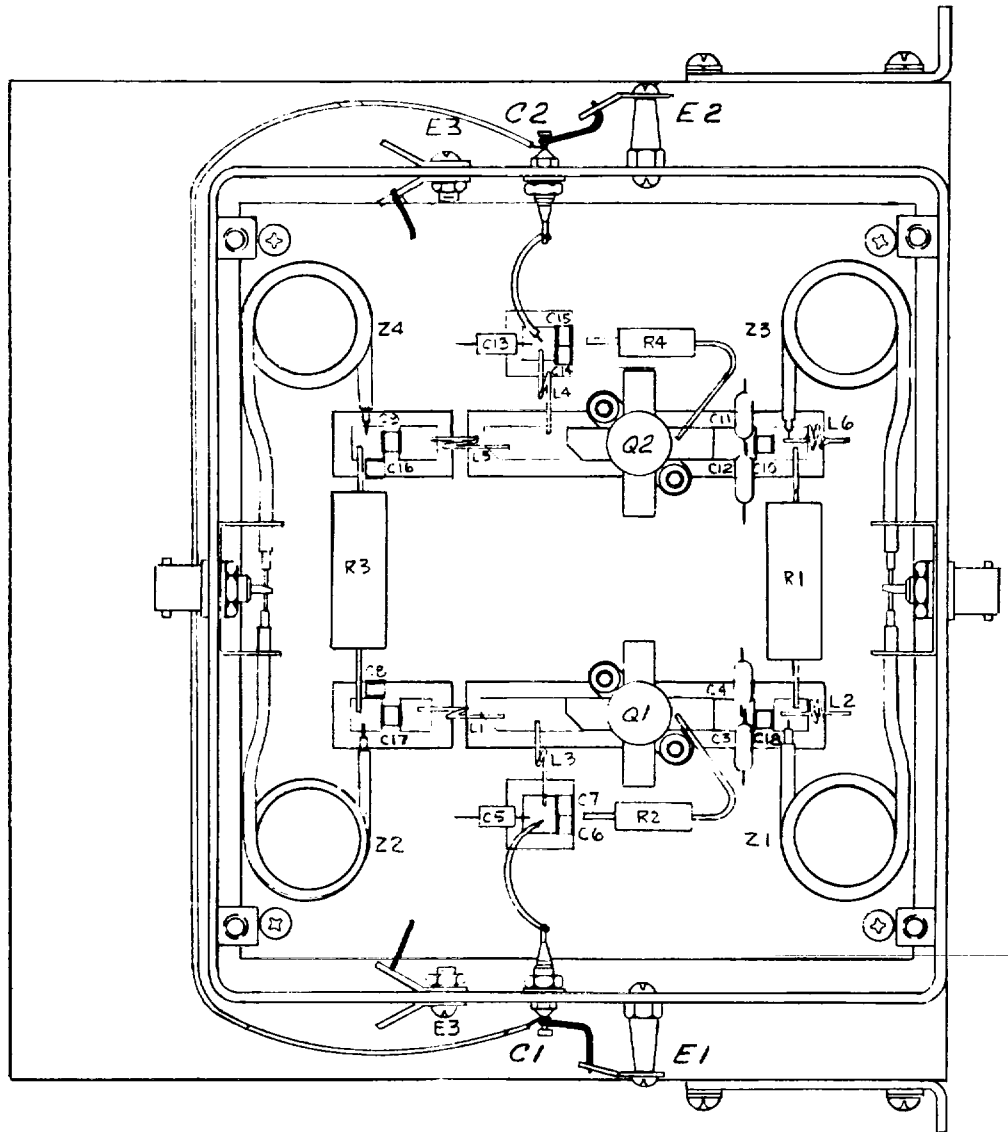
Power Amplifier Assembly, 1A4AR1 Parts Location Diagram
